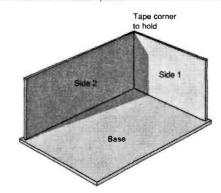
Assembling the box, using tape to hold the corners together before the adhesive is applied.
